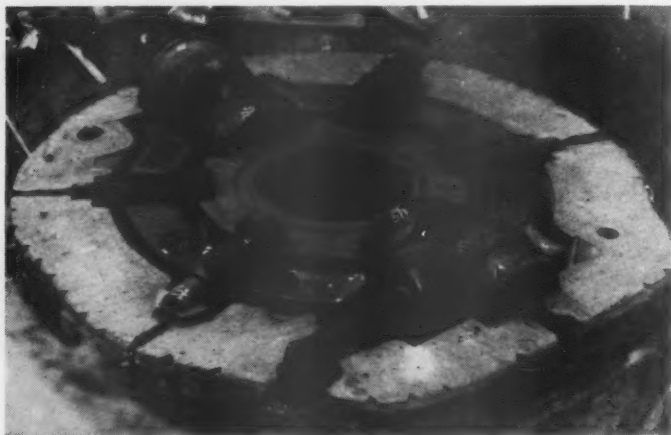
SMALL CORES LOCATED IN PROPER POSITION IN GAS ENGINE CYLINDER MOLD.
